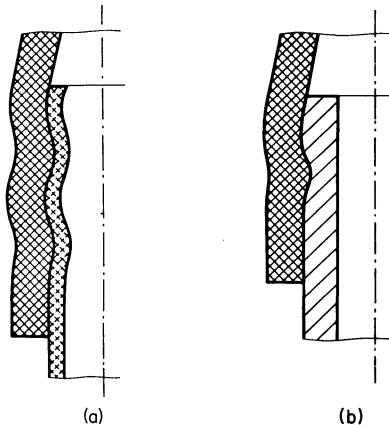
Shape of pipe ends to be connected with rubber tubings: (a) glass tube; (b) metal pipe
